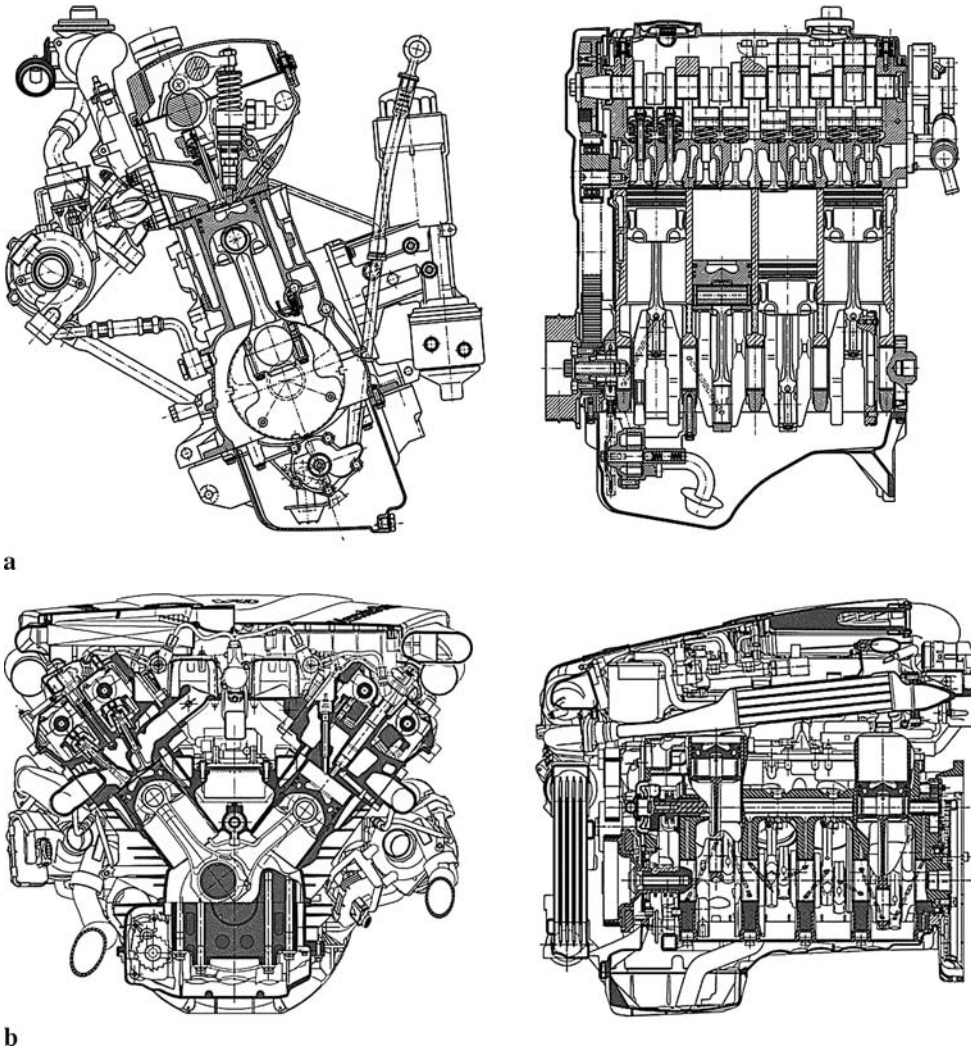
a Four-cylinder, single-overhead-cam, direct-injection turbocharged diesel automobile engine (courtesy of Volkswagen Audi GmbH). b Double-overhead-cam V-8, direct-injection turbocharged diesel automobile engine (courtesy of Mercedes Benz GmbH)
